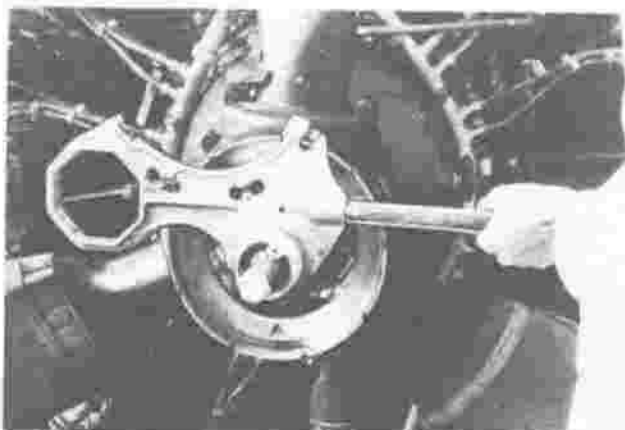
Tightening Distributor Valve by Using Composite Wrench
